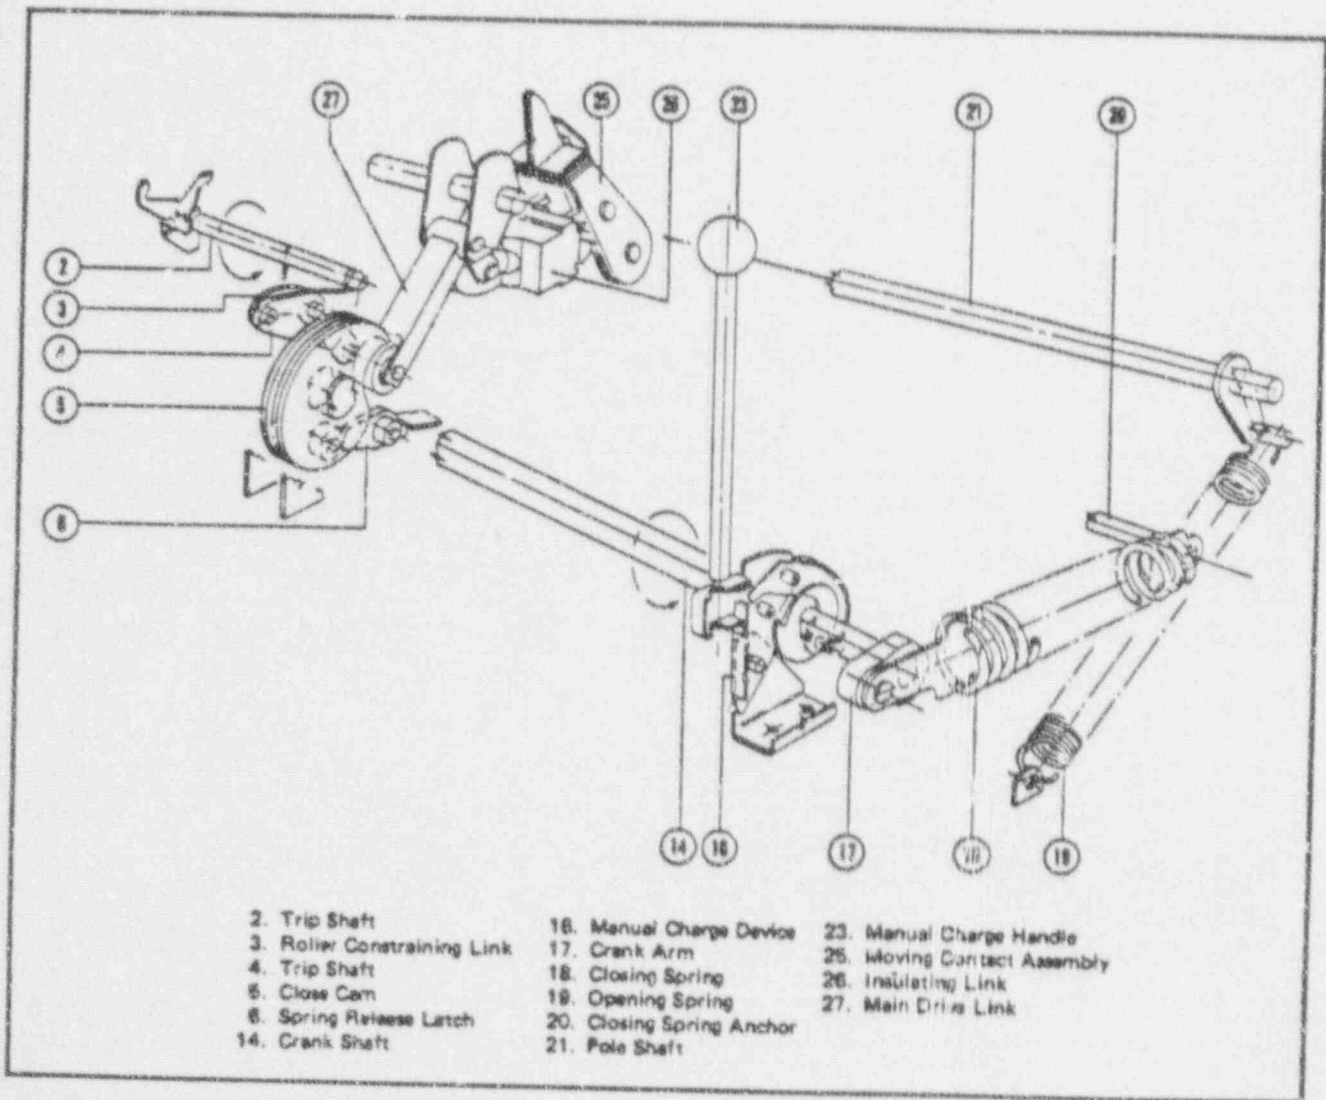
Principal Parts in a Manually Charged Spring Operated Mechanism.
